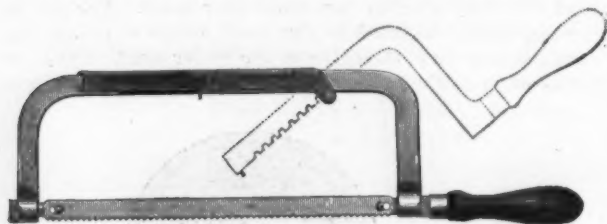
Improved Adjustable Hack Saw Frame, No. 31.
